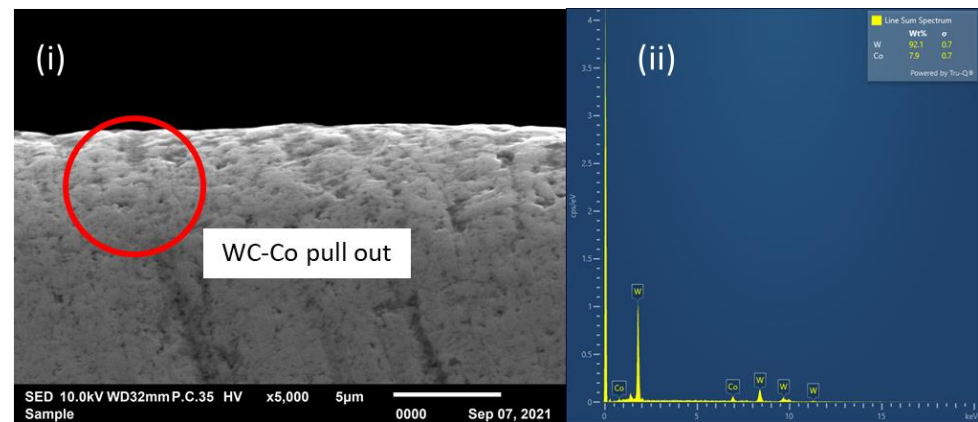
(i) SEM image of WC dislodged of the cutting tool and (ii) EDX analysis of the uncoated tungsten carbide tool when milling with 170 m/min in dry condition for 6000 mm machining length.
